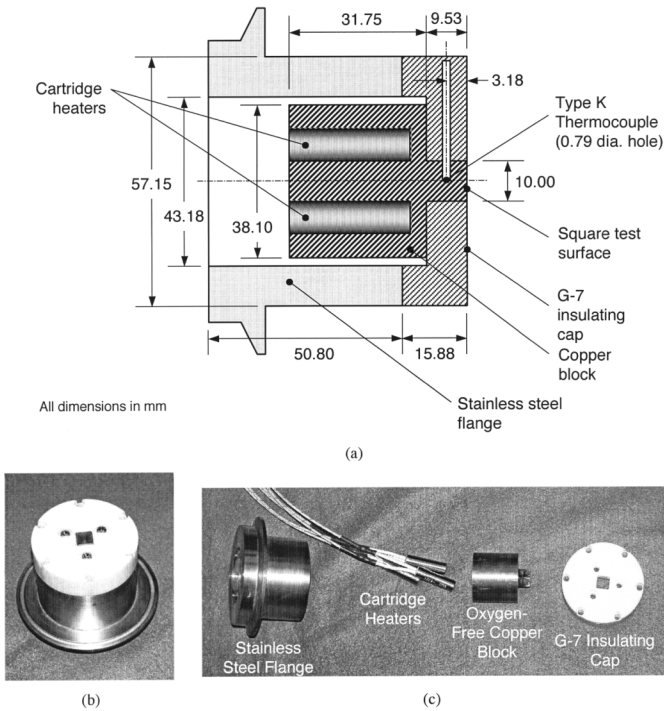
(a) Construction of test heater. (b) Photo of heater assembly depicting square test surface centered in G-7 insulating cap. (c) Photos of individual test heater parts.
